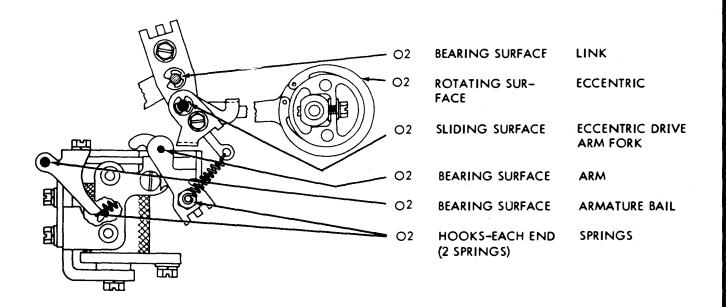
Backspace Mechanism for Chadless Tape, Power Drive
